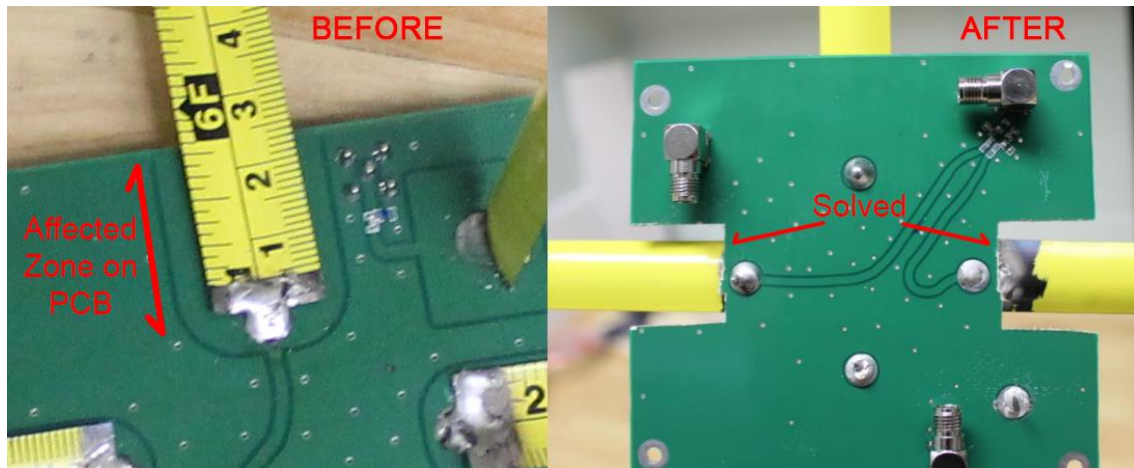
After and before the machining of the unwanted section marked as “Affected zone on PCB”. Machining should be done on both dipoles.
